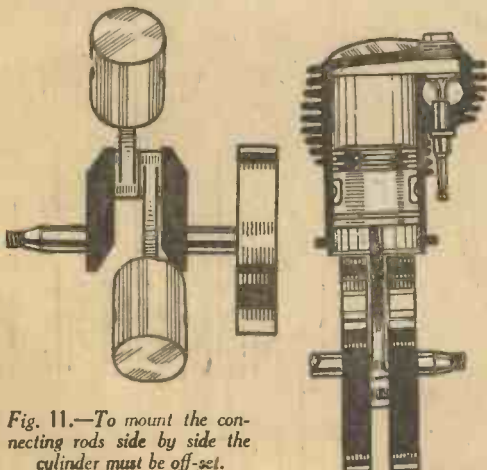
To mount the connecting rods side by side the cylinder must be off-set.
